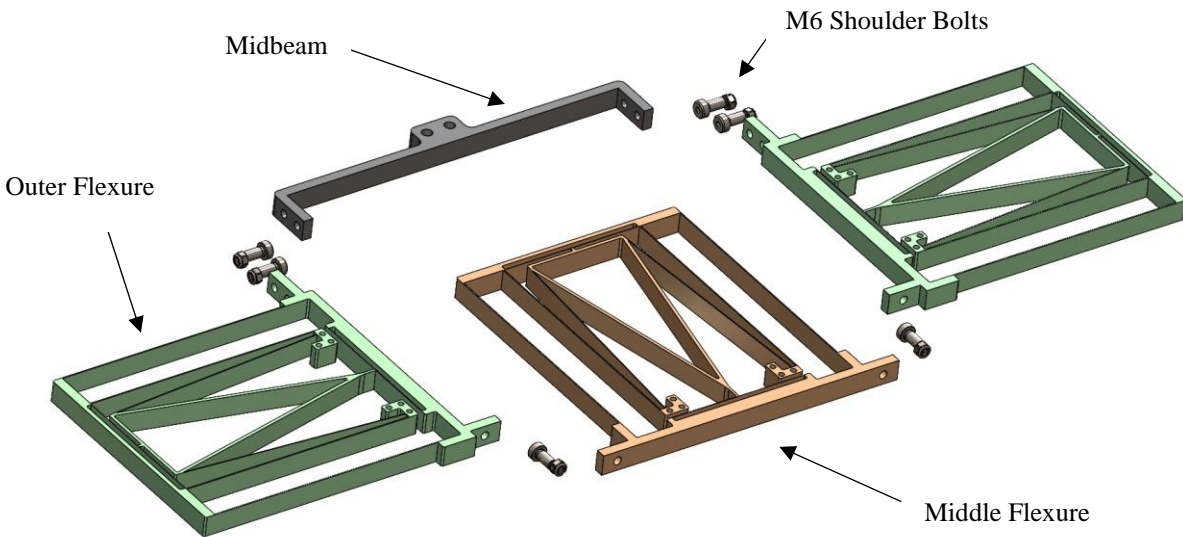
Exploded assembly of a quarter stage assembly (QSA)
